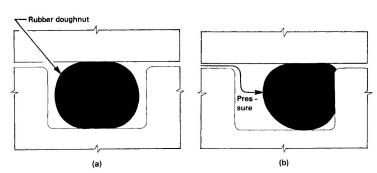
How an O ring works. (a) As installed. (b) Under pressure. (From The Parker O-Ring Handbook, courtesy of Parker Seal Group.)
